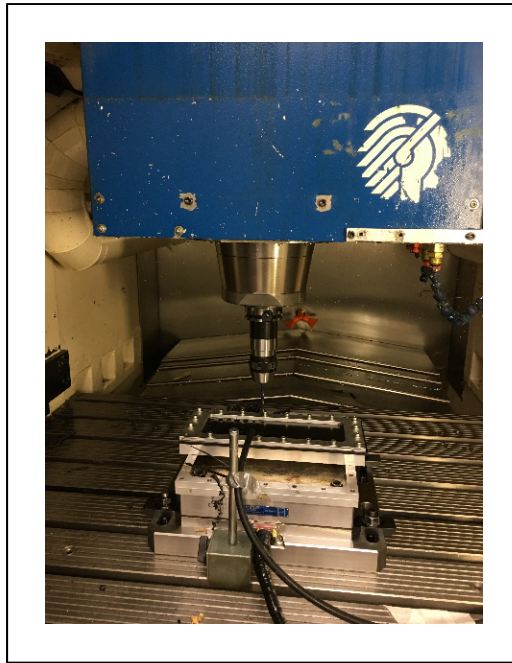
Image of workpiece sample mounted on table dynamometer and the Huron CNC milling machine tool
